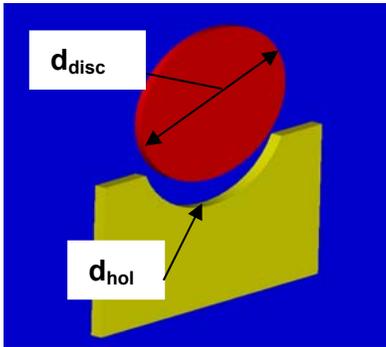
Curvilinear mode of the welded joint (injection molded disc and plaque will be joined together by linear vibration welding). Thickness of weld beads may vary from 1.6 to 6.25 mm.
